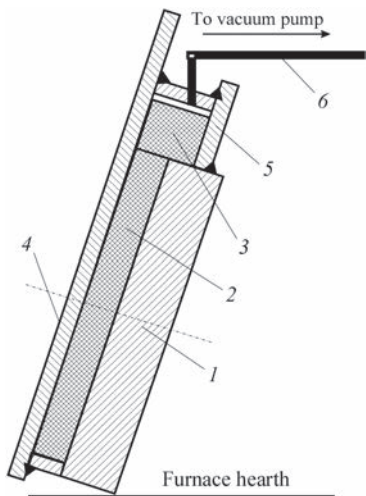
Scheme of cladding the billet by flowing with forced replenishment: 1 — carbon steel base; 2 — brass sheet; 3 — brass for replenishment; 4 — cover; 5 — accumulator; 6 — nozzle for vacuum pump
